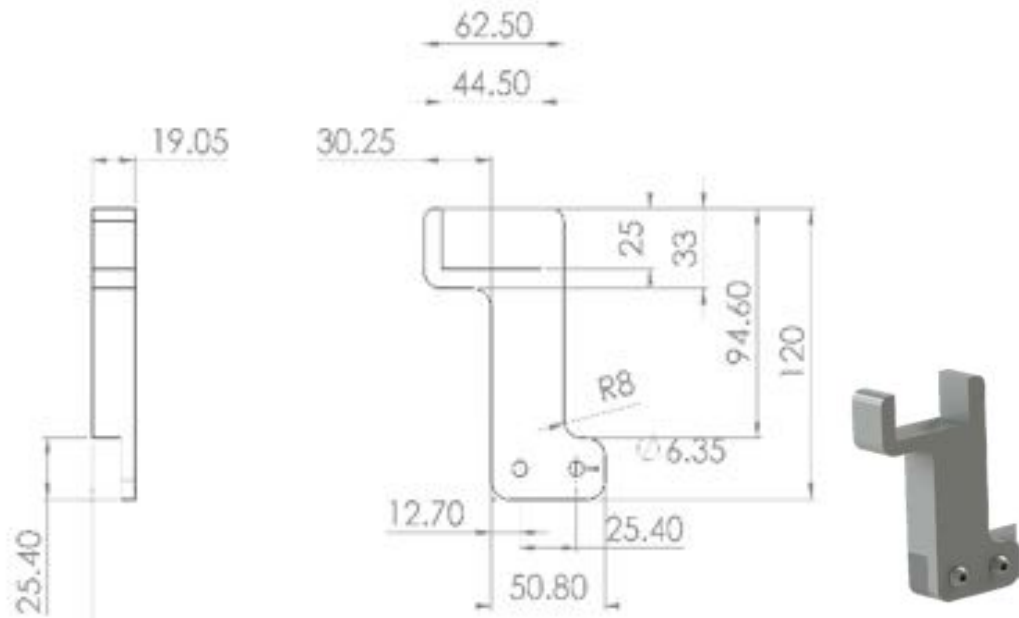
Fixed End Stabilizer Bar Composition & Dimensions
